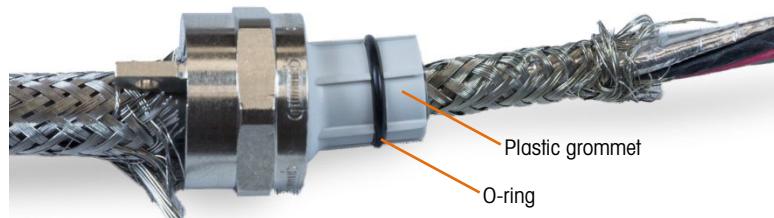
Outer Component of POWERCELL Cable Gland Disassembled
